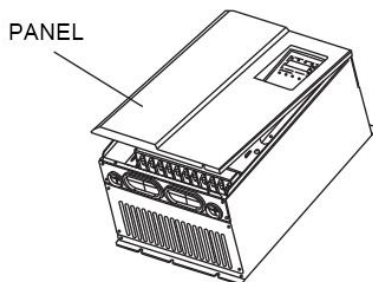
Removal of the lower cover plate of the sheet metal shell
